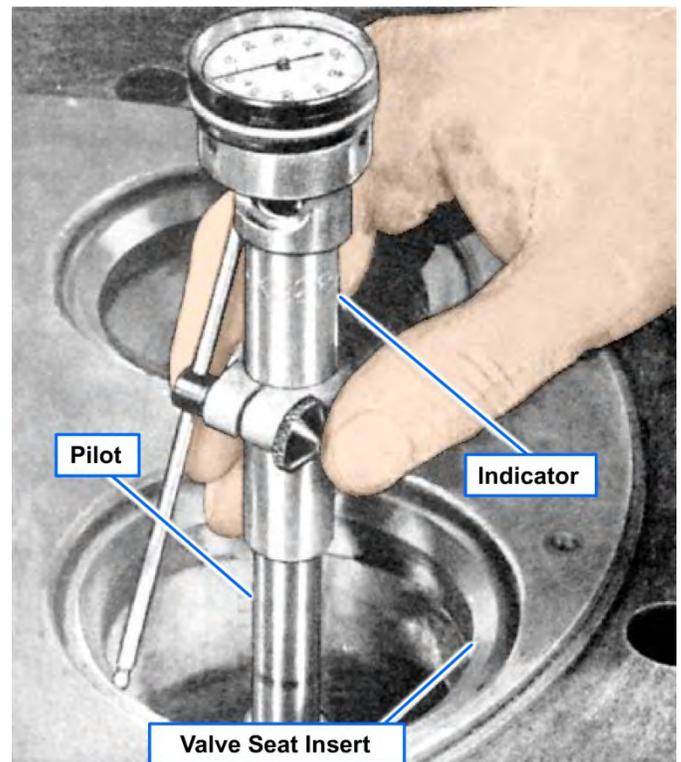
Determining concentricity of the valve seat with a dial indicator.
